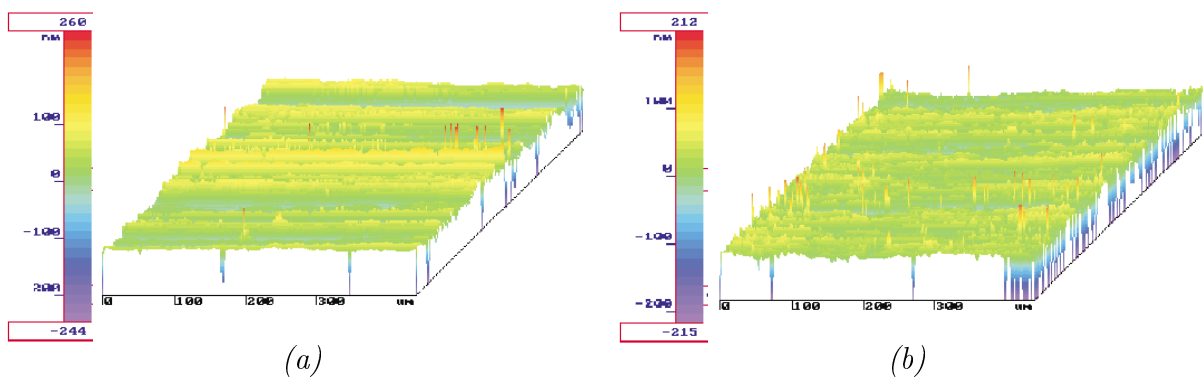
Surface heights of bearing B. (a): For the outer raceway. (b): For the roller.
